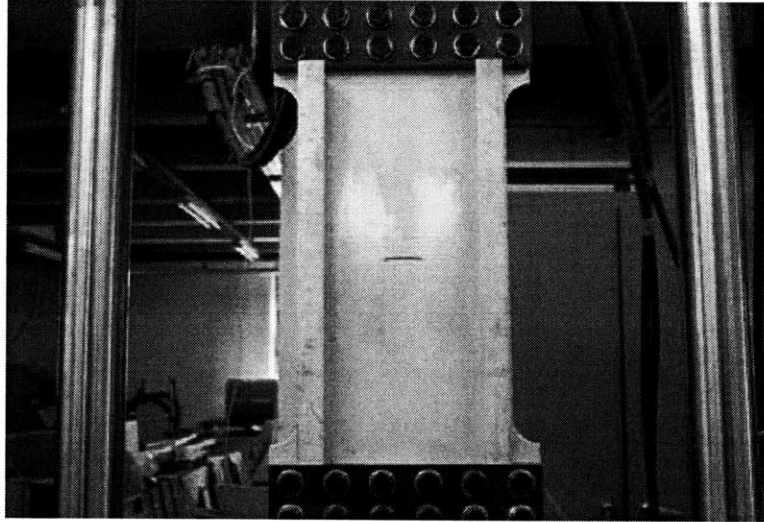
TSCCT specimen prior to testing mounted on the MTS device
